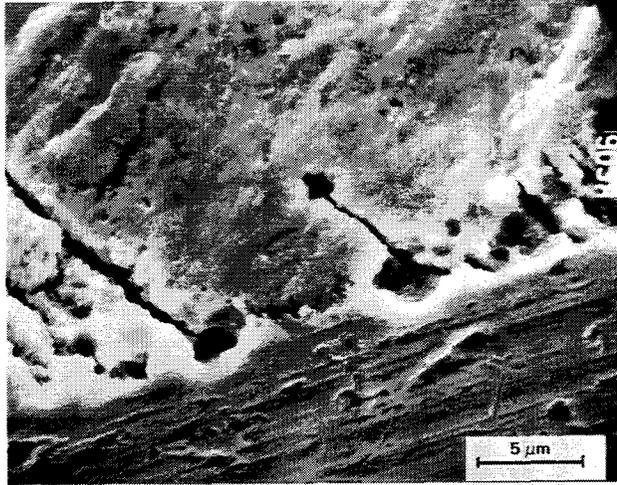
Example of corrosion pits and slots. The lower part of the fractograph shows the inner perimeter and part of the surface of the central hole in the pin
